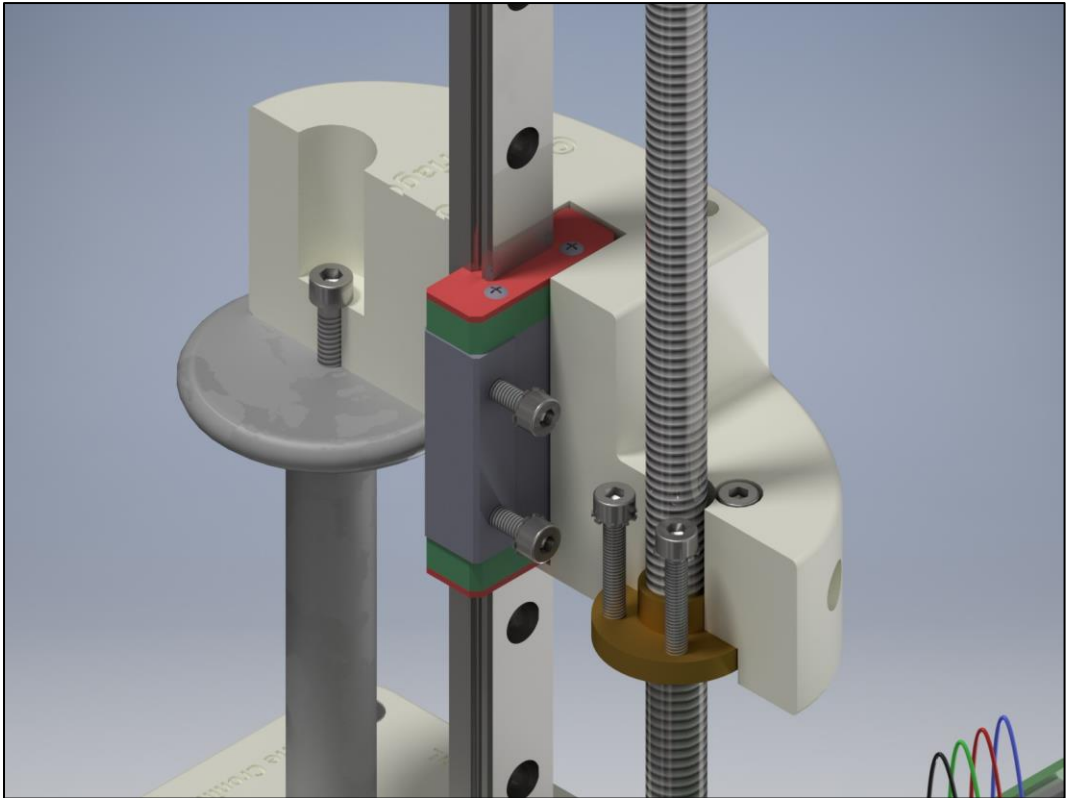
Section view of the new pump carriage. Note the new lead screw nut, the clearance hole for the syringe bolt, and the locking washers on most screws.
